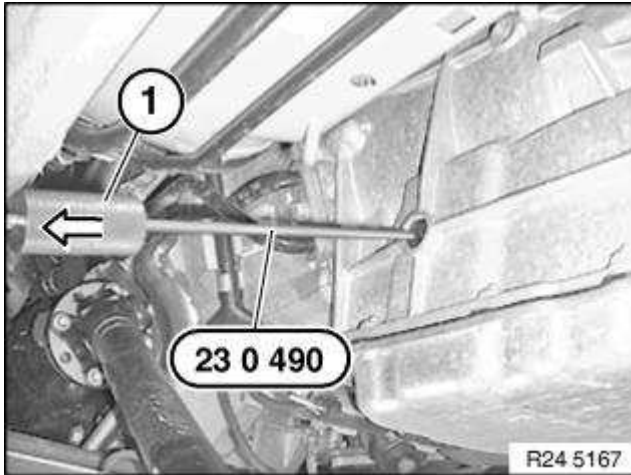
Drive Out Sealing Cap With Impact Weight (1)
